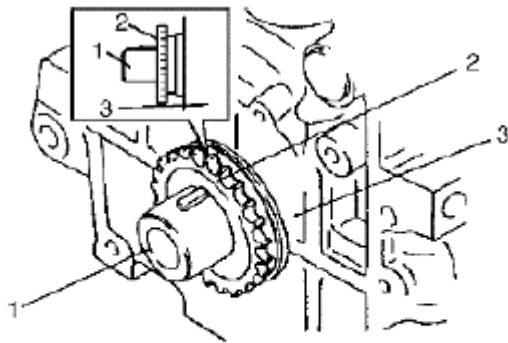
Identifying Crankshaft Timing Sprocket & Timing Chain Guide No. 1
